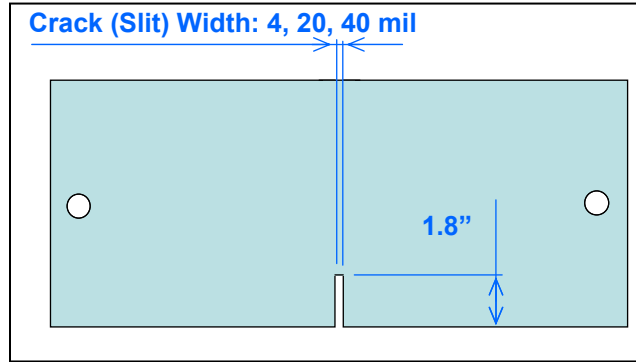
Crack (Slits) Fabricated by Electrical Discharge Machining
